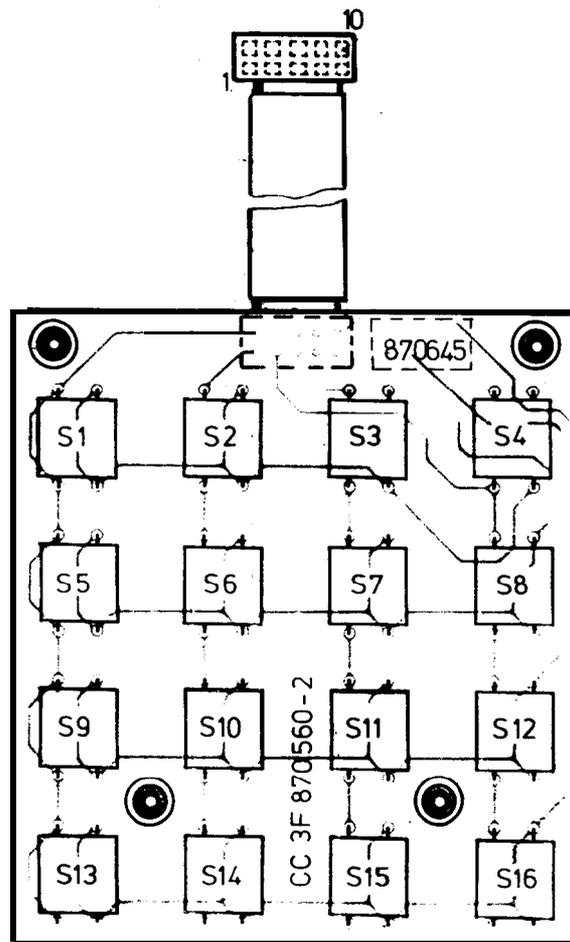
Keyboard Parts Layout (board modification level 3 and lower)
